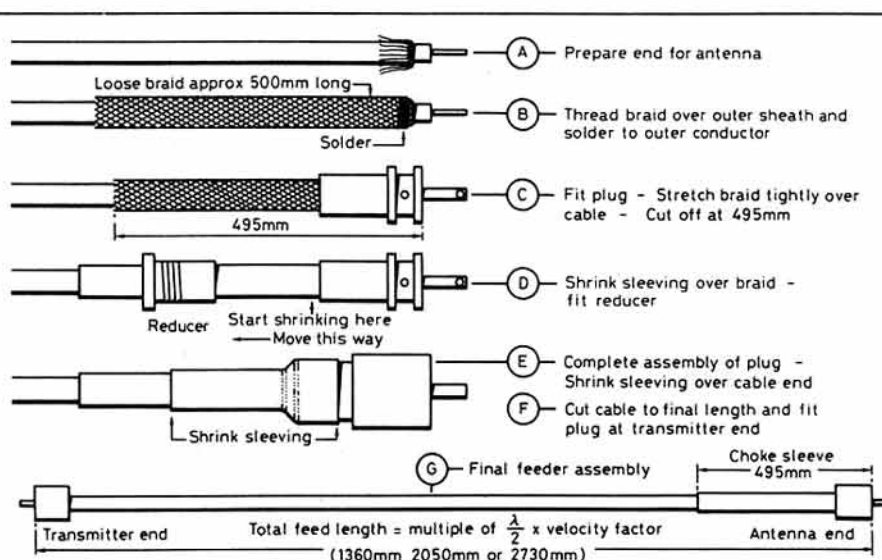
INSTRUCTIONS FOR CUTTING CABLES AND FITTING CONNECTORS
